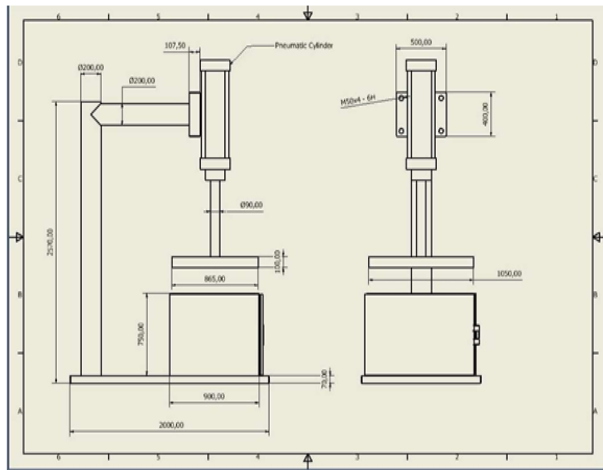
The drawing of the machine is done using Autodesk Inventor.
